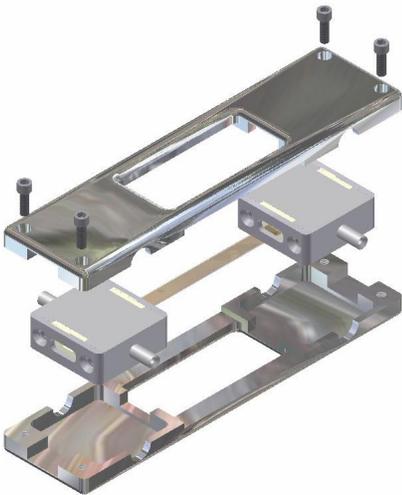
Hollow slide holder. Exploded view of components showing fluid reservoirs “headers” at each end of the hollow slide and embedded into stabilizing holder. Each header has an inlet and an outlet.
